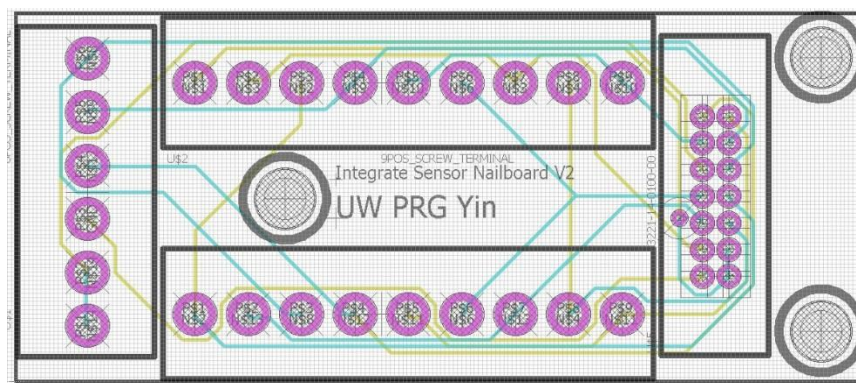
The custom PCB board used to receive microfluidic channel lead wires and relay signals to DAQ device. Three through holes for mounting are presented in grey. Figure has a drawing scale of 2.77:1.
